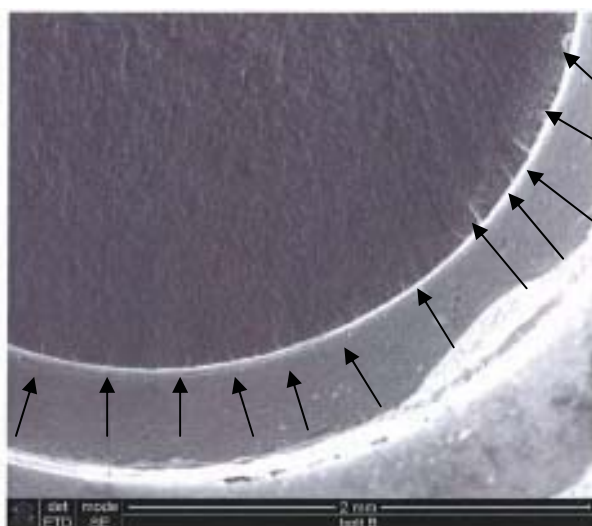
Part of the fracture surface showing multiple initiation.
